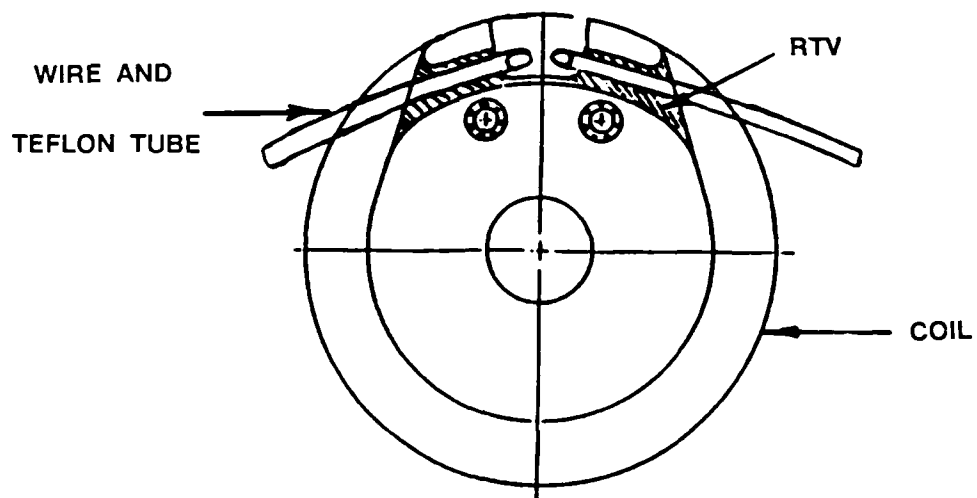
Coil Winding Assembly Depicting Flex Leads in Position with Potting Compound
